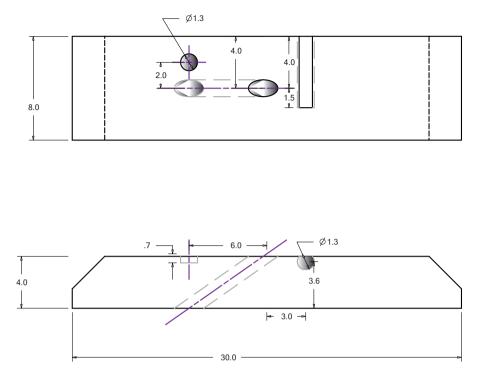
B7 Construction fixture block. Dimensions in cm are non-critical.
